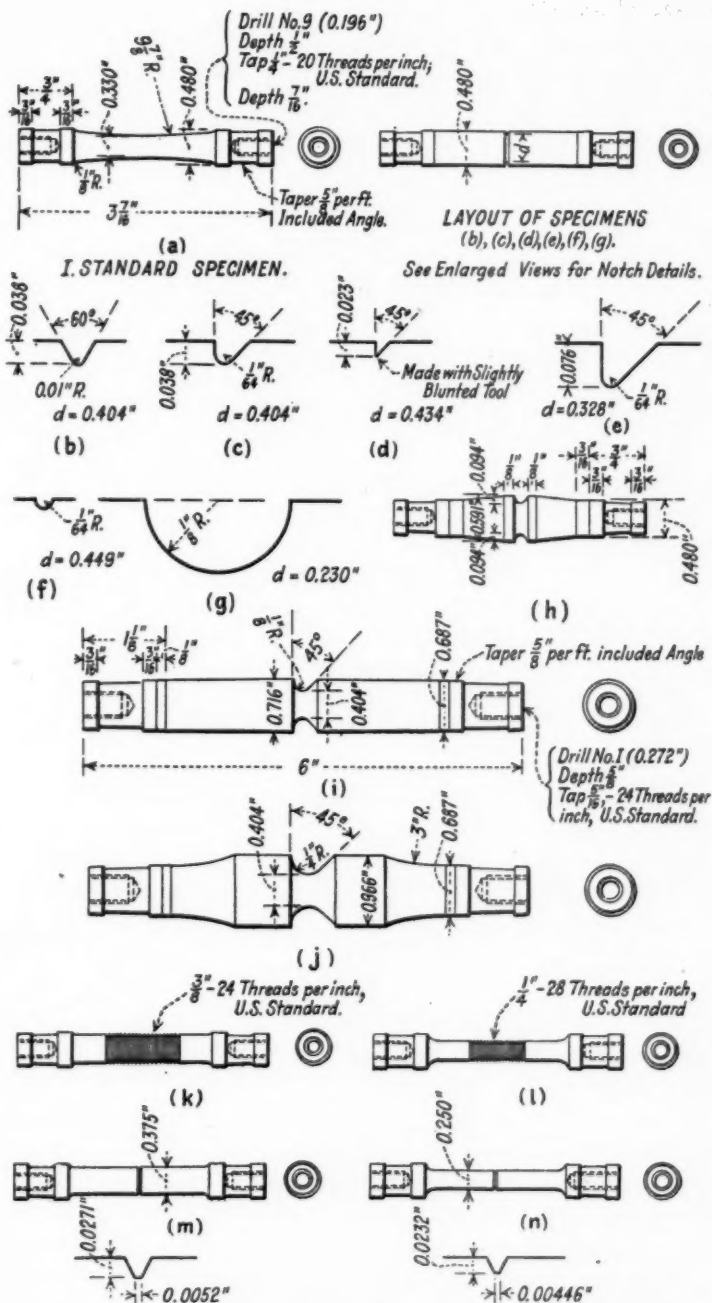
Grooved and Threaded Fatigue Specimens.
